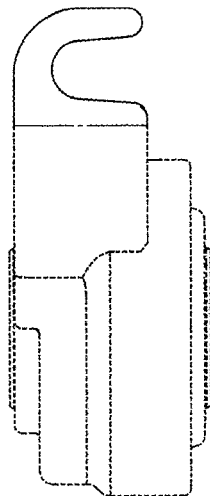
is a plan view of a rotary damper of FIG. 1;
